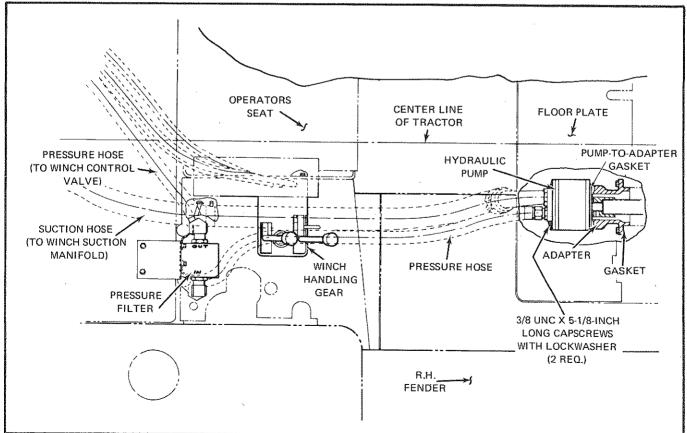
Removal of Hydraulic Pump (D8 Tractors).
